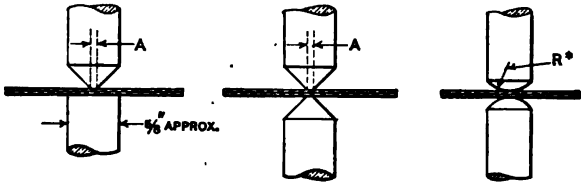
Shape of Electrode Points used on Electric Spot-welding Machine for Various Purposes
